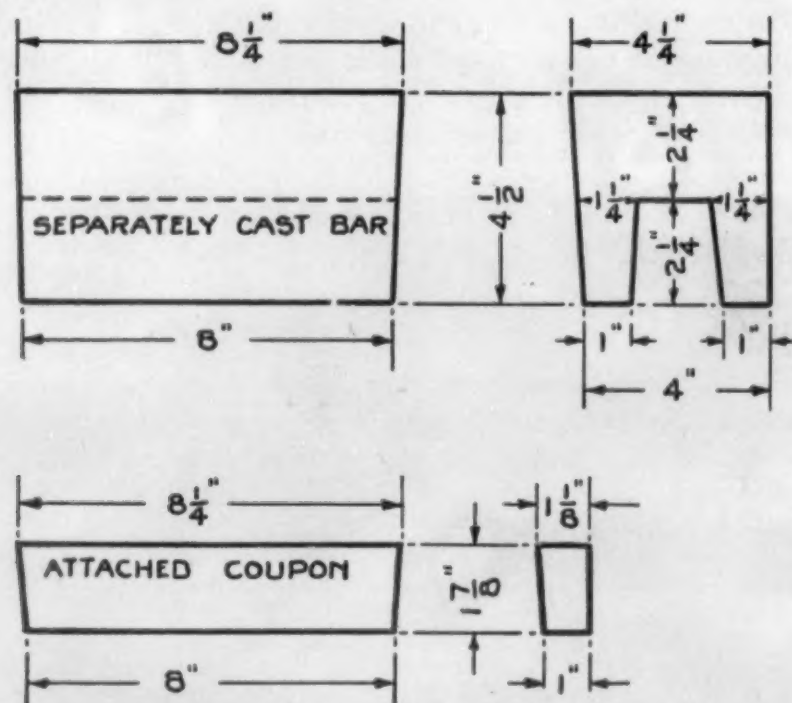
Form and Dimensions of "Block" Type Test Bars
